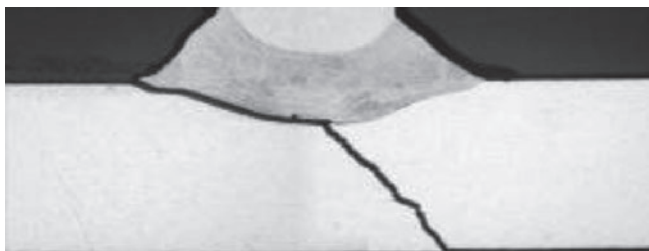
Fatigue crack propagation in laser welded aerospace Al-alloy (Reproduced courtesy: GKSS, M. Kocak)
